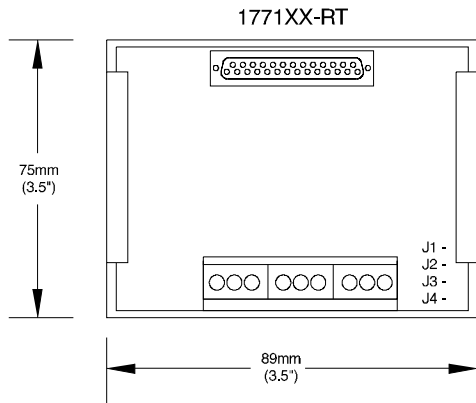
MOUNTING DIMENSIONS FOR 1771XX-RT REMOTE TERMINATION PANELS
